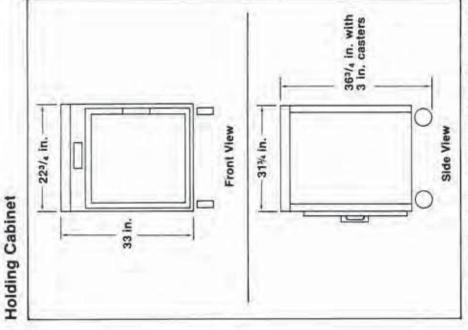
Holding Cabinet Dimensions with 3 in. Casters
